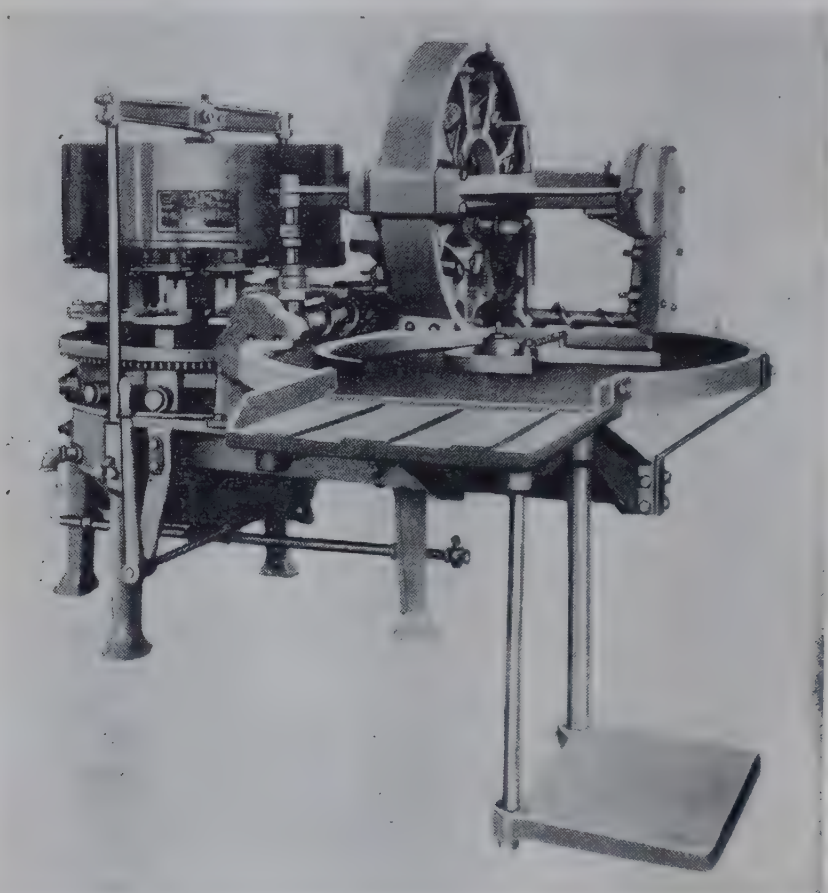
Can-draining and syrumping machine. (*Courtesy Food Machinery Corporation.*)
